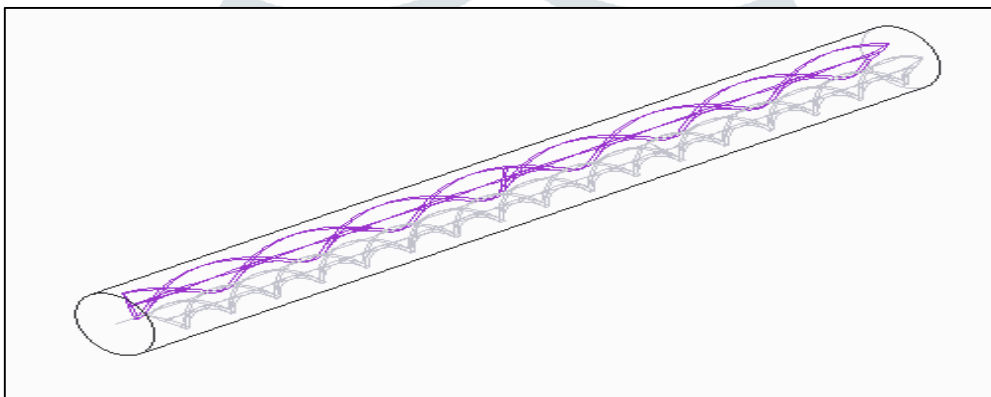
Wireframe CAD model of heat exchanger using twisted tapes (Y_0/Y 2)
